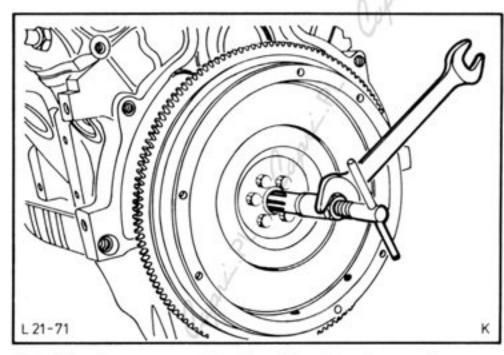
Remove crankshaft pilot bearing using Special Tool 21-037-A.
